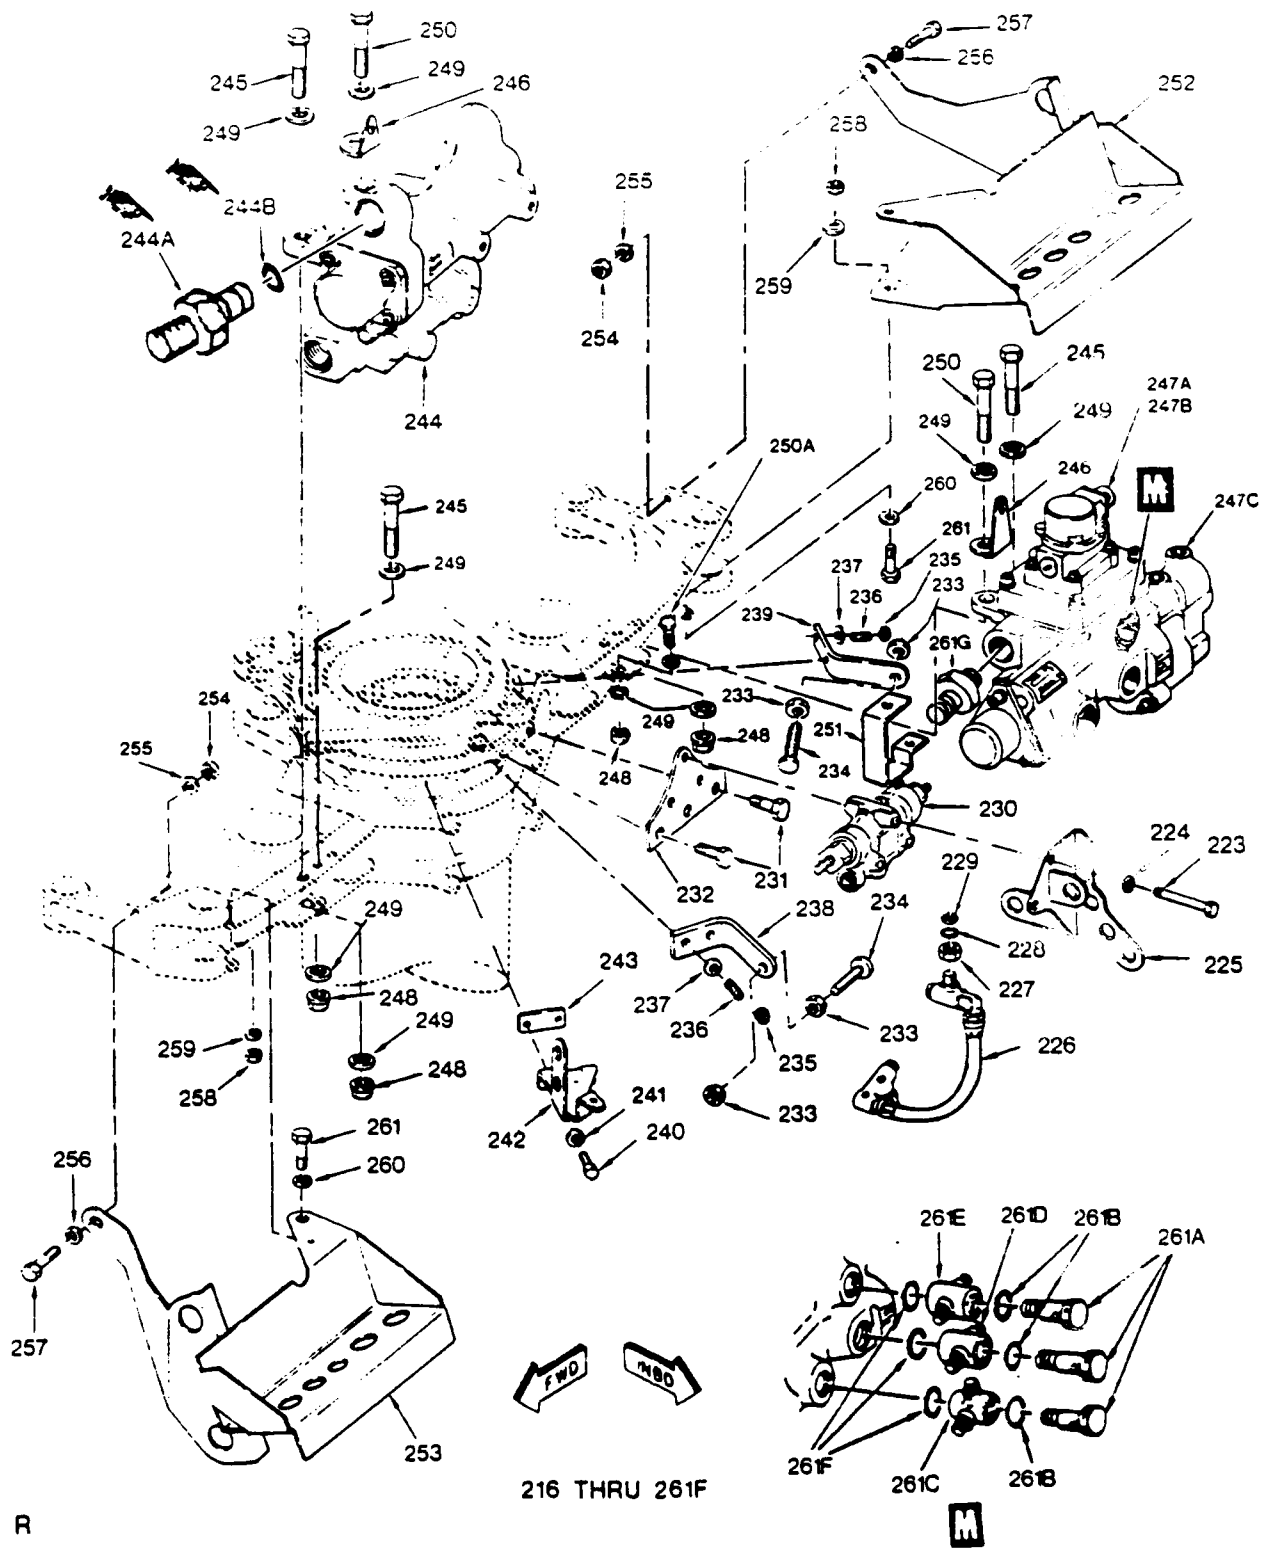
RH Aft Strut Assembly (Sheet 11 of 18)
